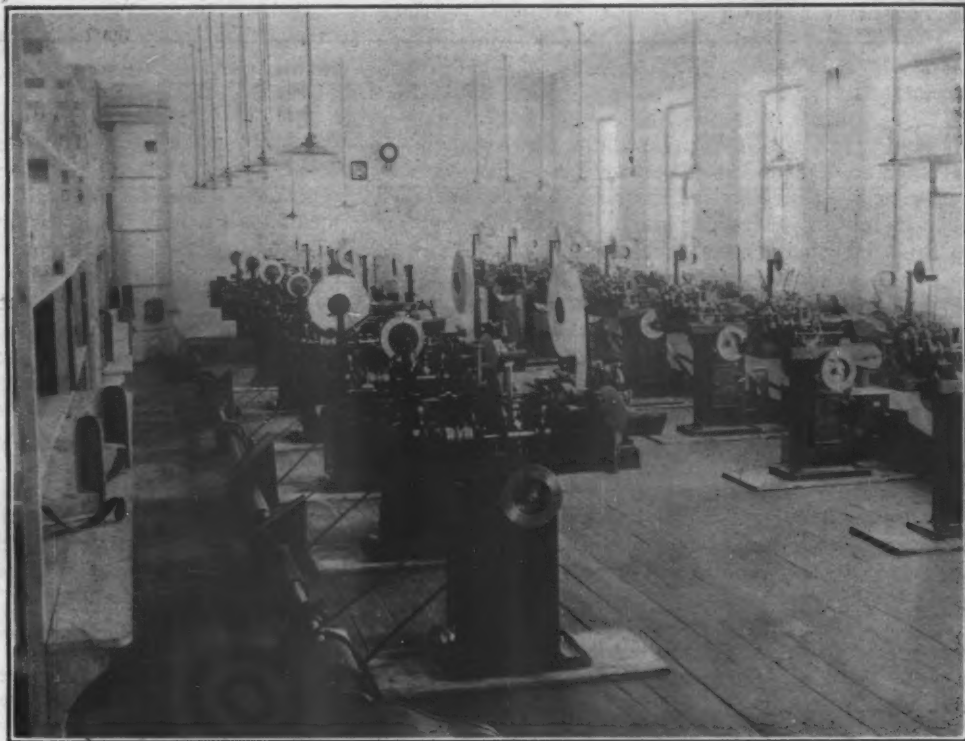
Testing Completed Machines at the Semenoff Machine Works.
